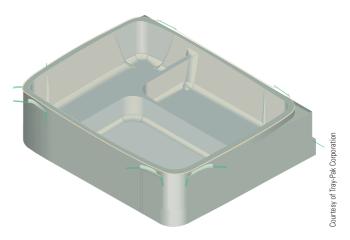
A mechanical designer used CAD software to design this mold used to produce plastic food storage containers.
